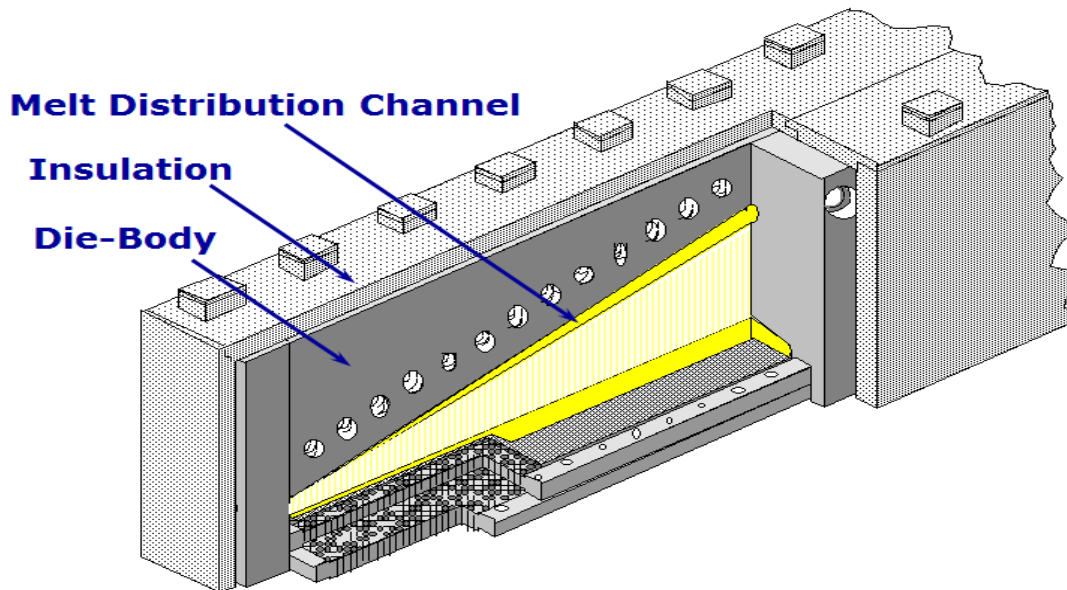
Components of the SMS Die Body Assembly. BERRY©
